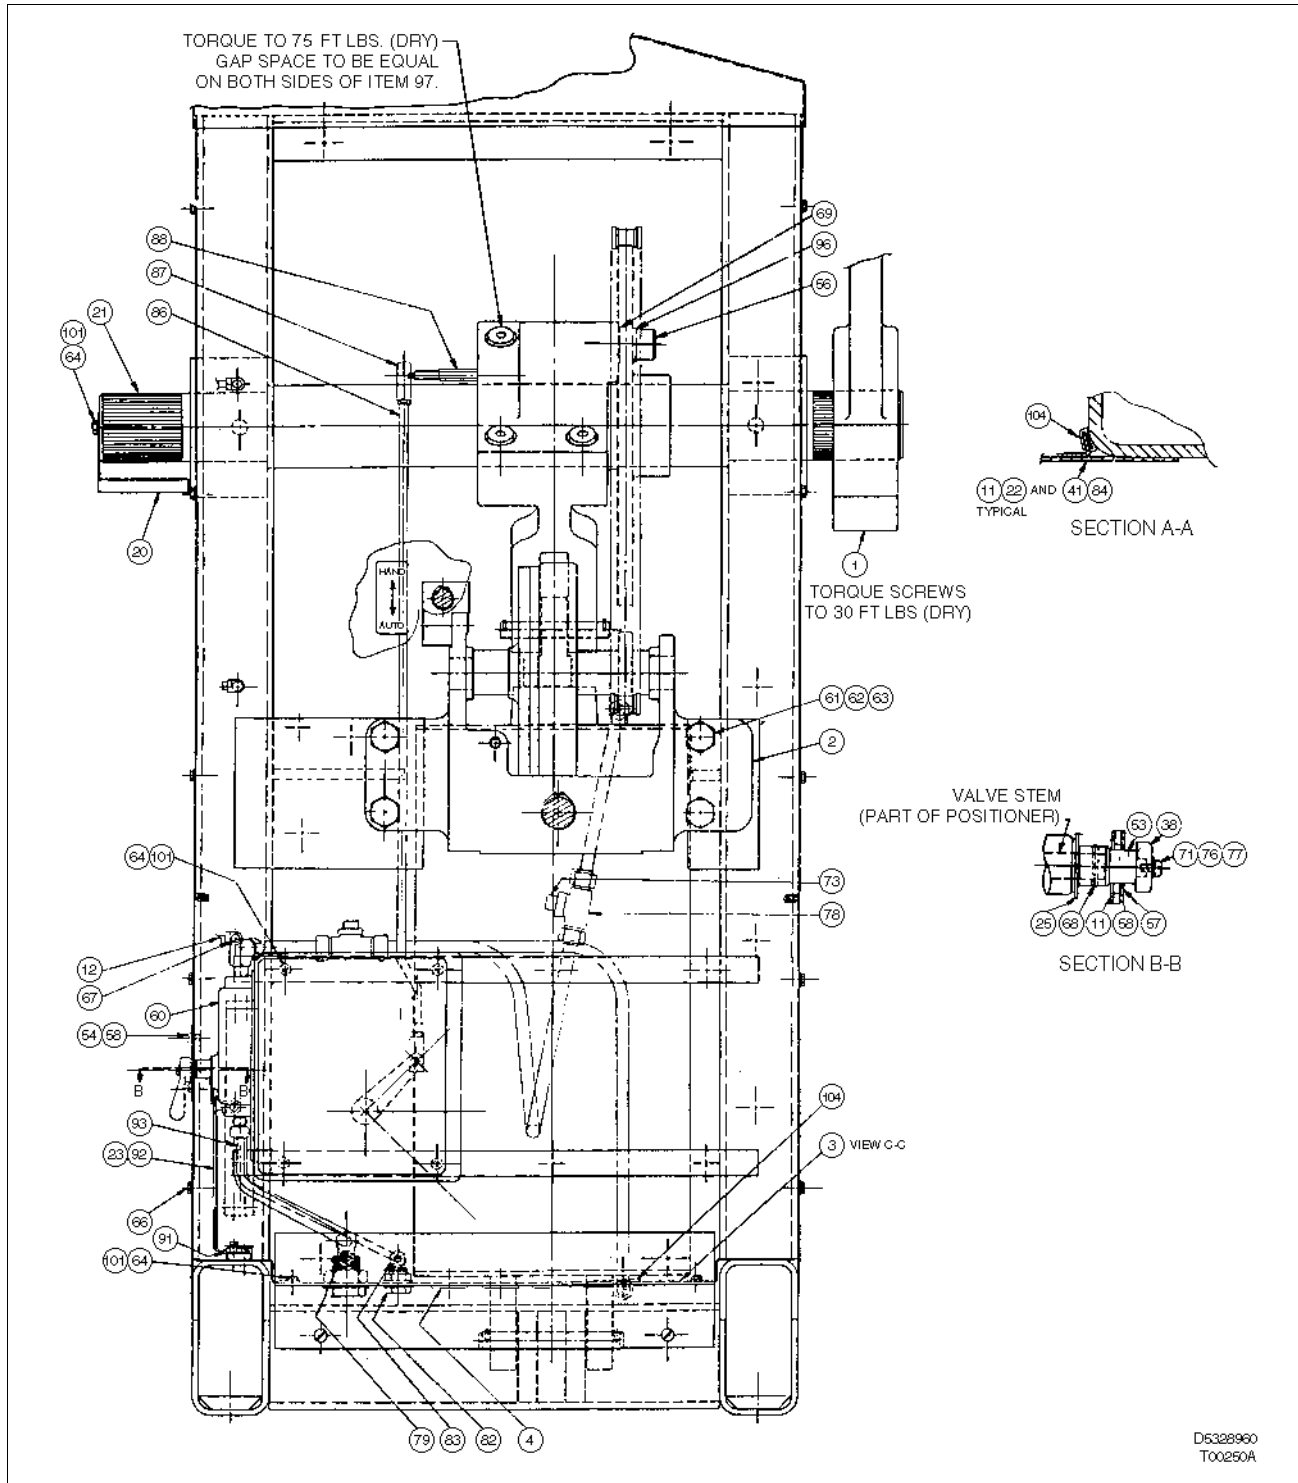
UP5 and UP6 with Positioner, Tables A-34 and A-35 (Sheet 1 of 2)
